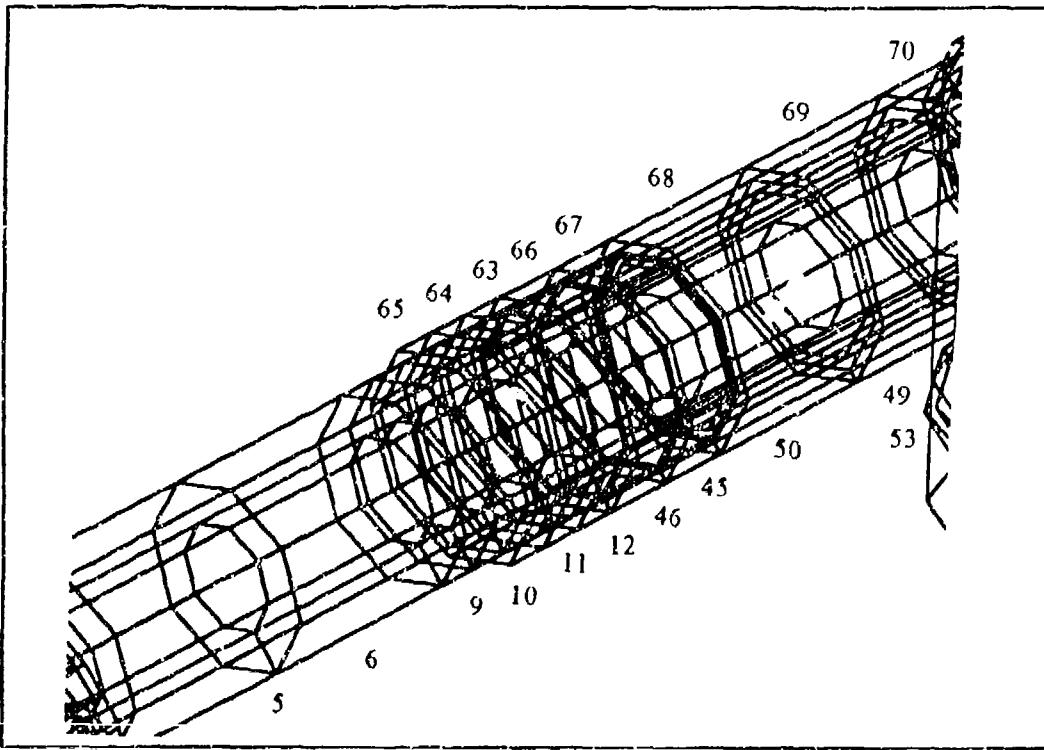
Attachment Point of Right Gear Leg and Aft Crosstube
